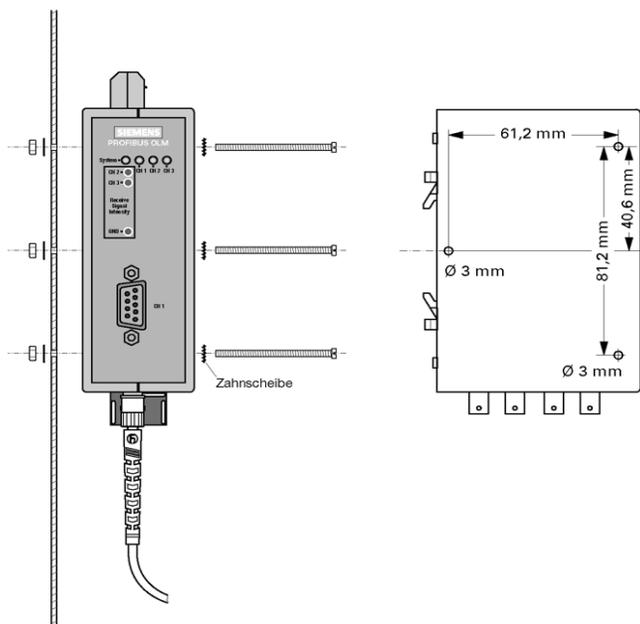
Mounting the Optical Link Module OLM on a Mounting Plate
